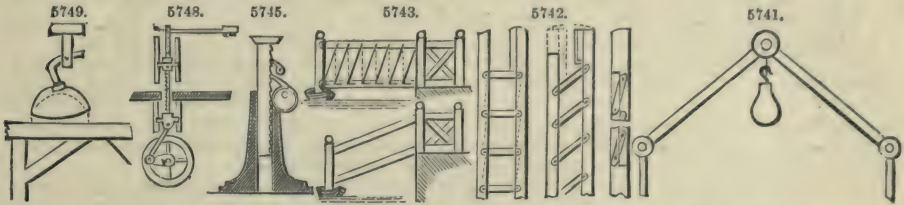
Gig-saw, the lower end connected with a crank which works it, and the upper end connected with a spring which keeps it strained without a gate.
